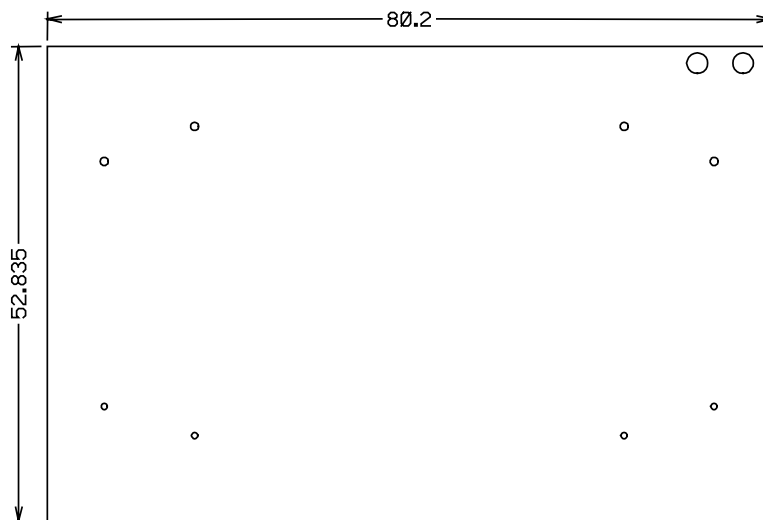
Physical Dimensions debugCORE-167CR/167CS
